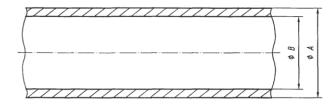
Wireline Core Barrel Inner Tube (Lower End)
